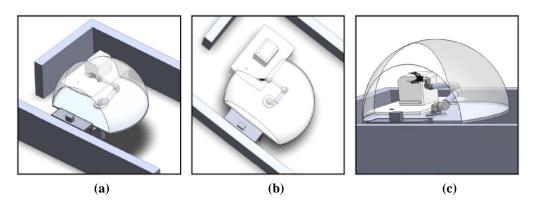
Enclosure Concept 3 - Full Enclosure (a) Isometric View (b) Top View (c) Side View
